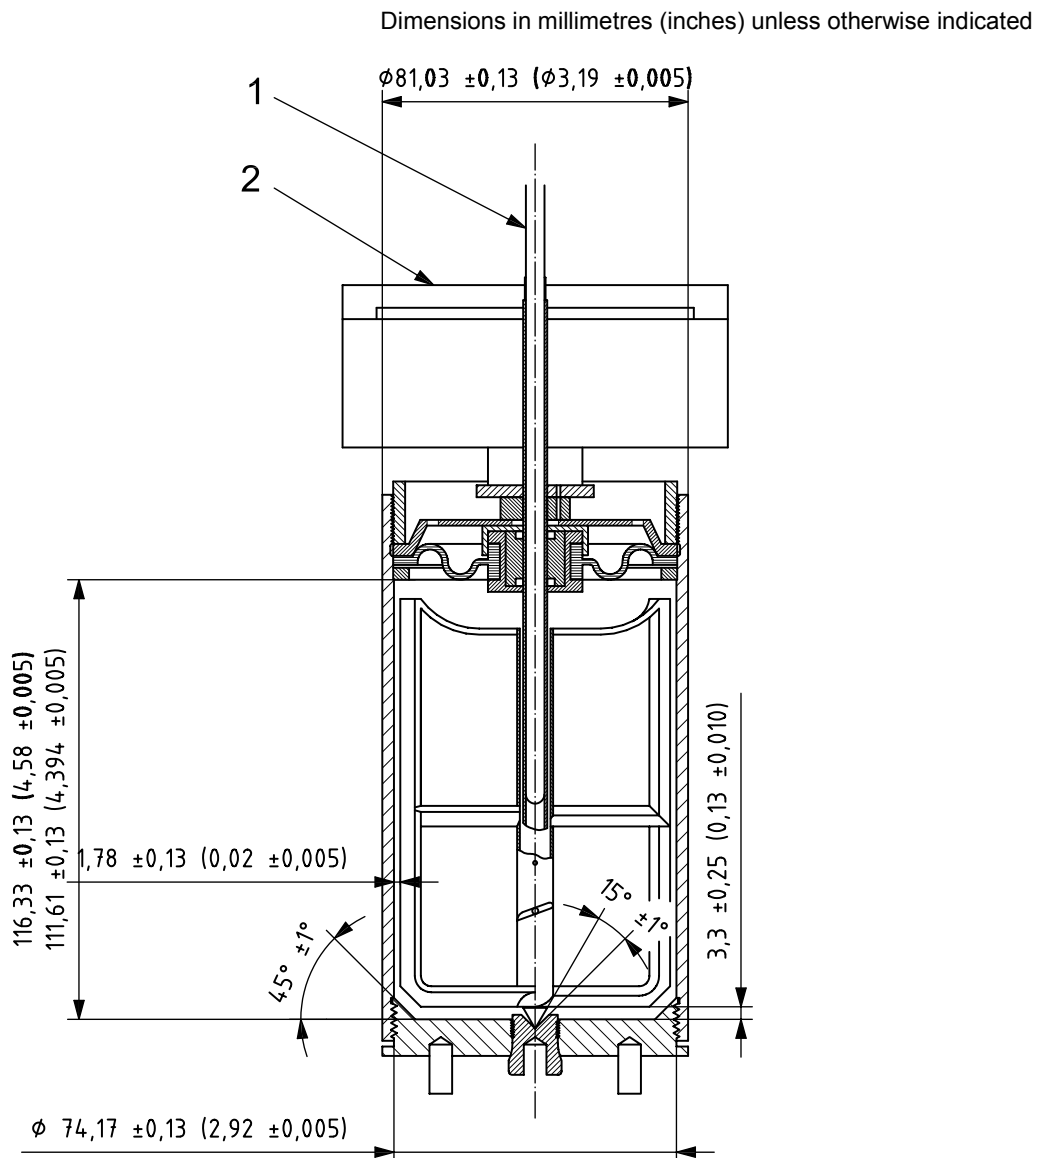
Typical gear drive consistometer for pressurized specification thickening-time test
